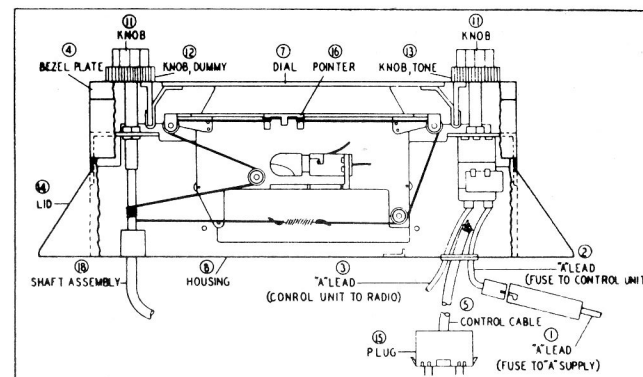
Control Unit C627M (Ford), Showing Location of Parts and Dial-Cord Installation Details
